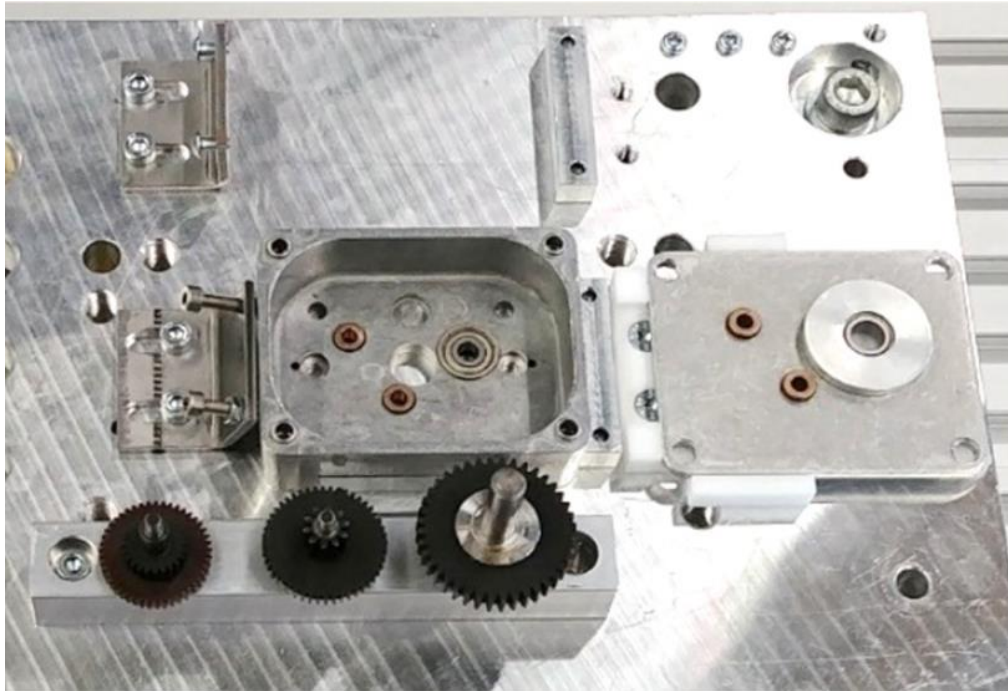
Spur Gear Unit before Assembly, Arranged on the Mounting Plate
